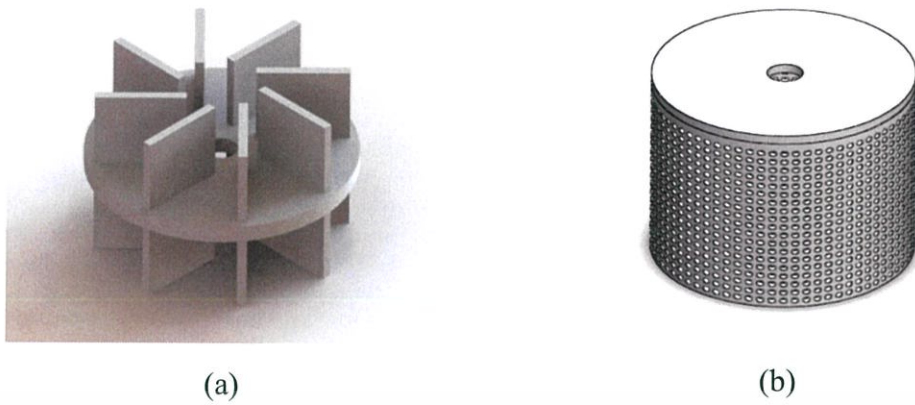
Components of bubble generator (a) Impeller and (b) stator of the bubble generator
